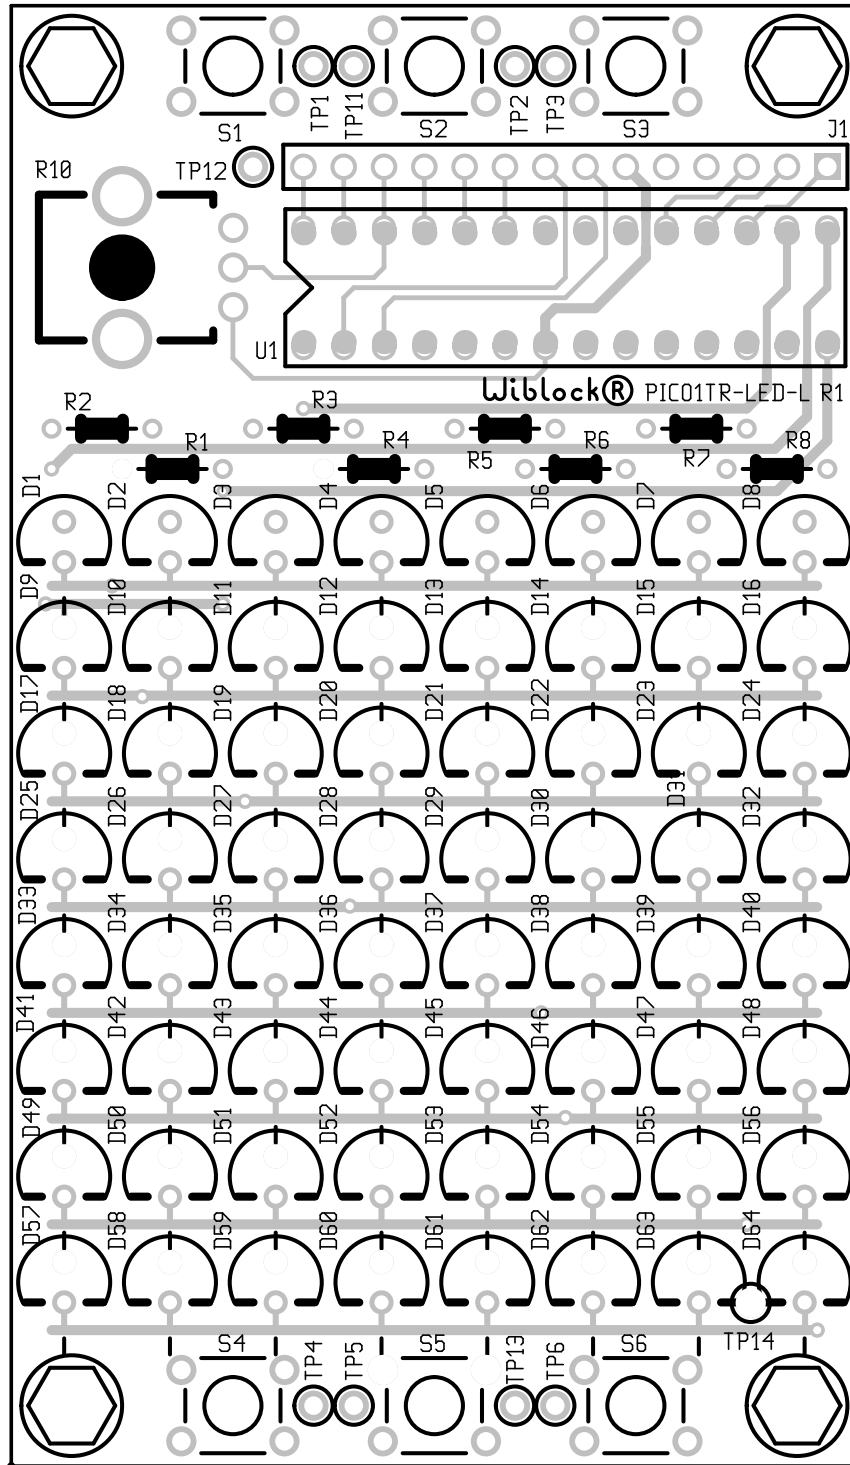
PICO1TR-LED-L Top Side Assembly Drawing (Rev 1)
